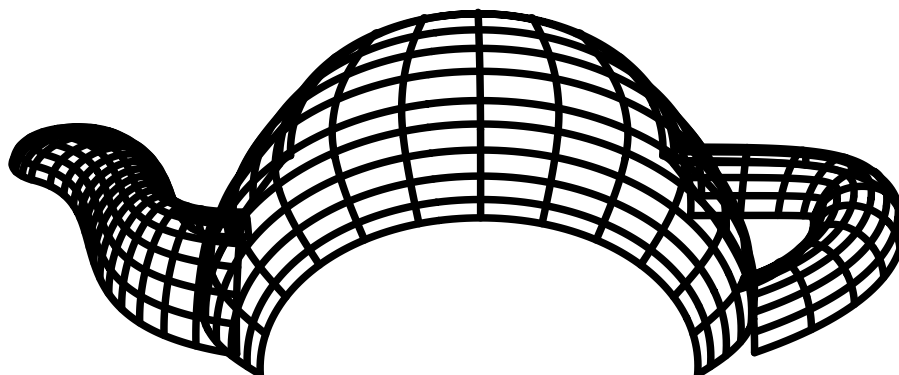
The left side of the body of the Utah teapot is to be milled using a 5-axis flat end mill. The two check surfaces, the spout and the handle, were offset by the flat end tool radius, before \mathcal{M}^S can be applied to them.
